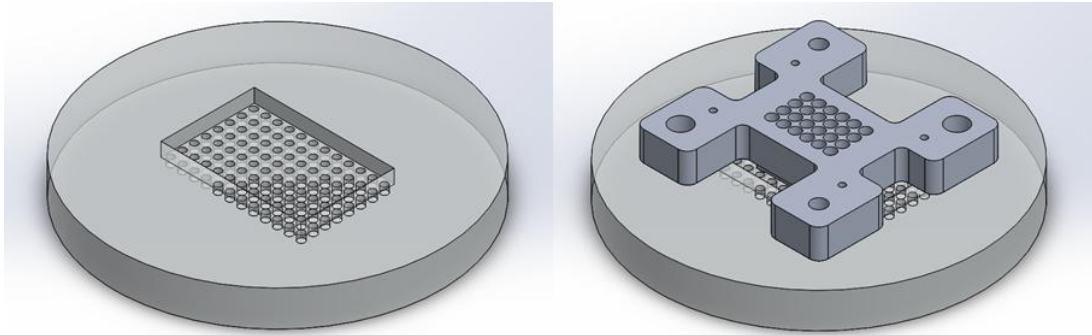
Microarray base connector. (a) SolidWorks isometric view of the microarray mold, the starting point for the design of the transfer device. (b) Assembly of the microarray base connector and the cell mold.
